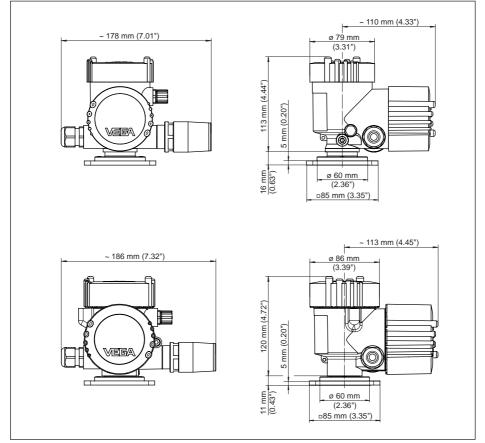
Dimensions PLICSMOBILE T81 with plastic housing and StSt/Aluminium housing
